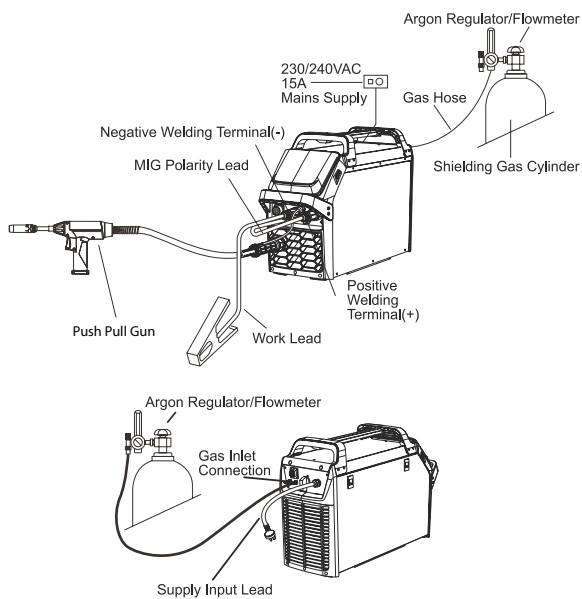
Setup with Push Pull Gun for Gas Shielded MIG Wire
